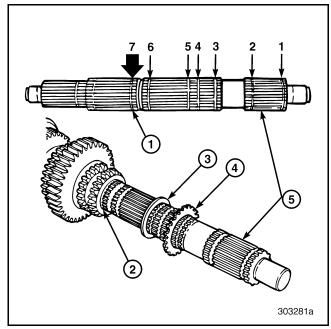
Installing Internal- and External-Toothed Thrust Washers (T313L/T318L Shown)
